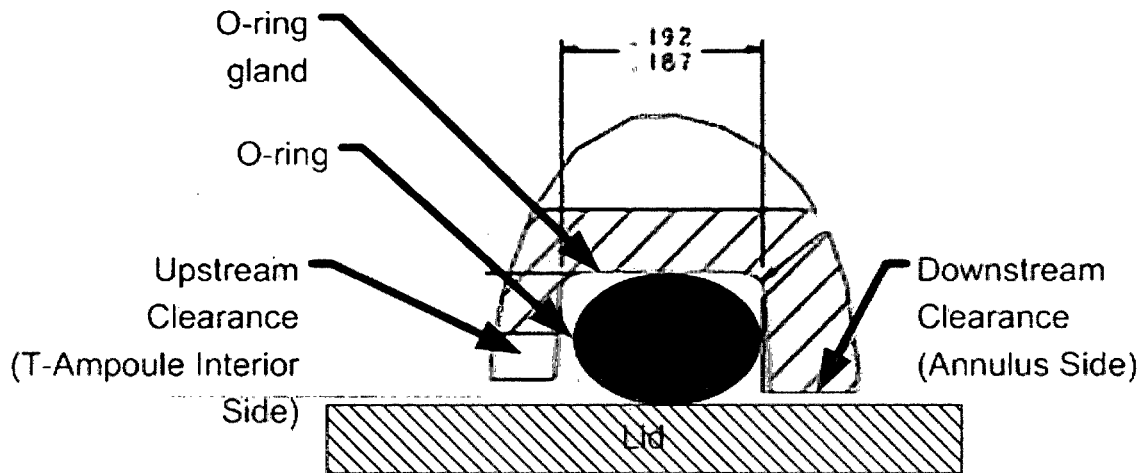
Pressure Containment for O-Ring Seals-[10, 11]
